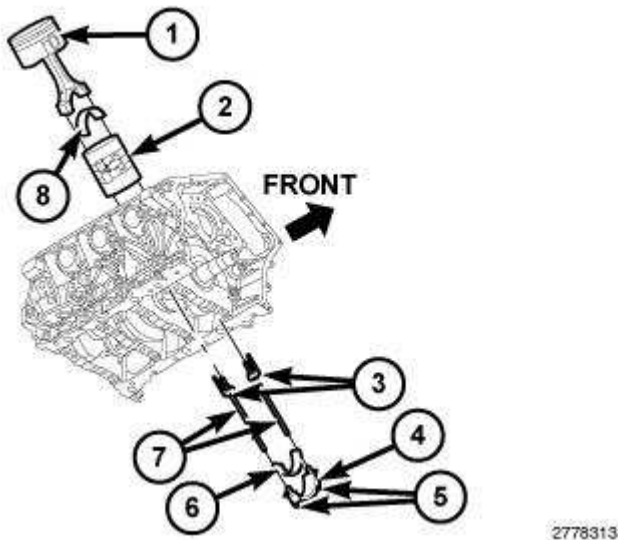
Piston, Connecting Rod Cap, Bolts, Plastic Guide Plates & Guide Pins
